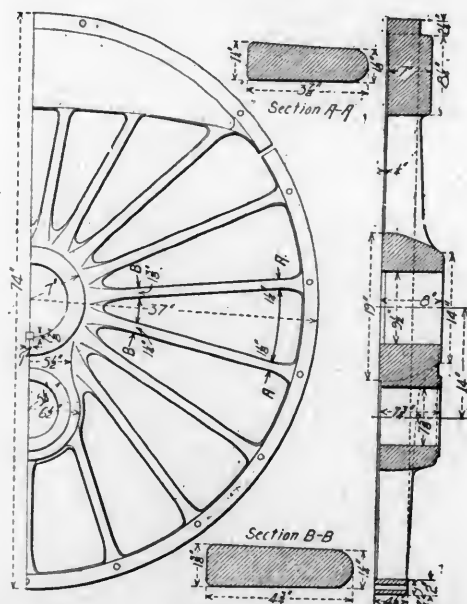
Lake Shore Passenger Front and Rear Wheels.
